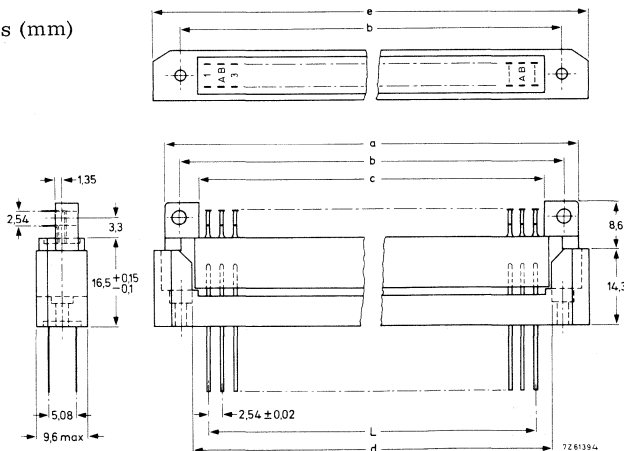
Connector showing board part with pins for dip soldering and panel part with pins for mini wire-wrap. See Figs. 3 to 7 for other types of panel part terminations. See Table 1 for dimensions a, b, c, d, e, and L.
